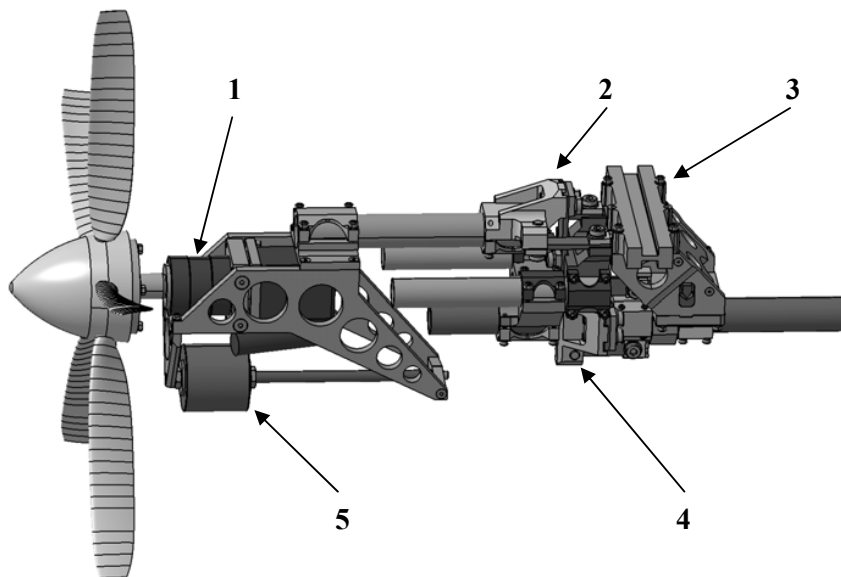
W-WING nacelle design drawing (1 - motor and gearbox; 2 - pitching attachment; 3 - wing spar; 4 - yawing attachment; 5 - massbalancing weight)
